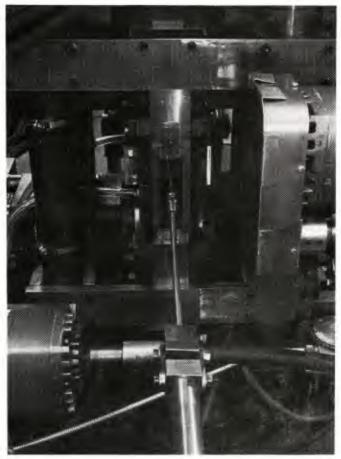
Set-Up for Compressor Blade Roll Forging; View of Exit End (#77-2119)
